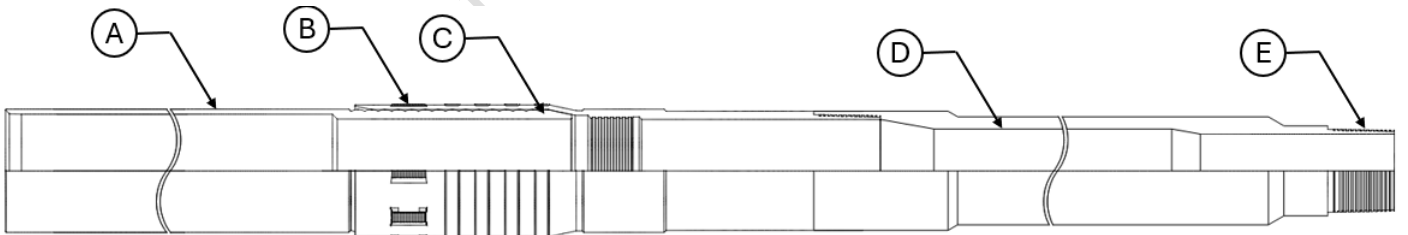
Hydraulic Set Liner Hanger Packer System
